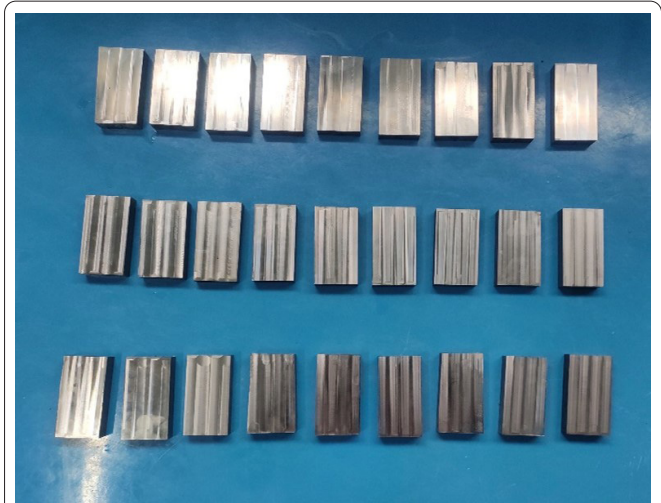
Photograph of the EN 24 Steel workpiece samples after machining.
